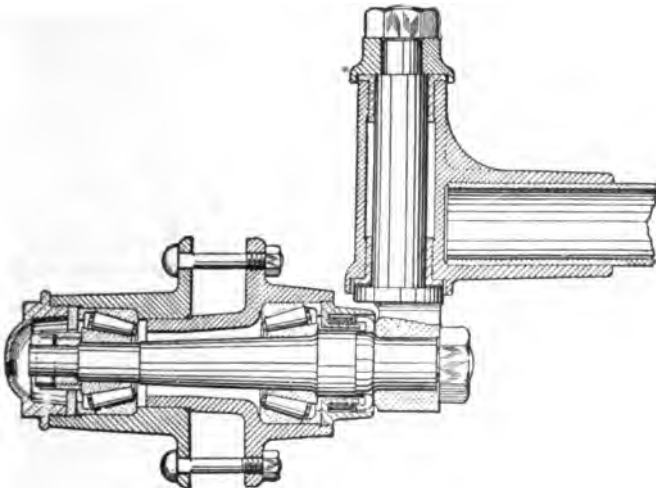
Stud Steering Axle showing Hub hung on Conical Roller Bearings. The shape of the bearings serves the double purpose of securing perfect rotative movement in forward travel; also to take up end thrusts.
